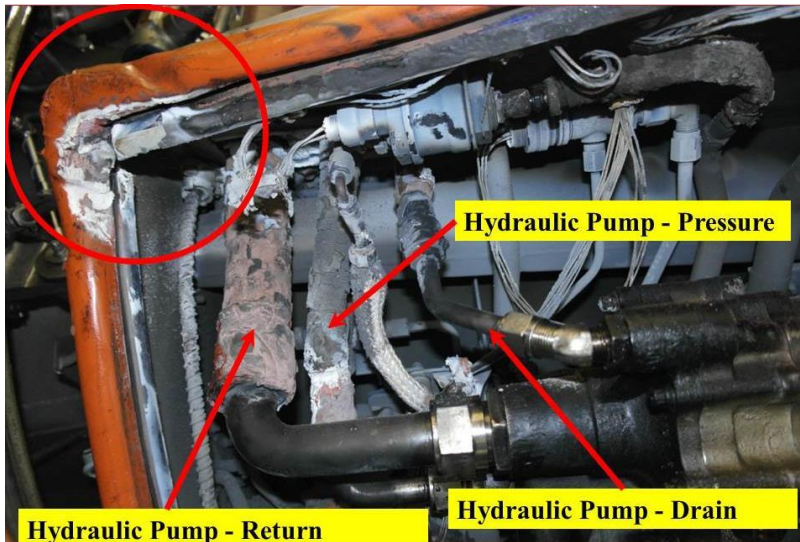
LEFT SIDE CORNER BULB SEAL DAMAGE
